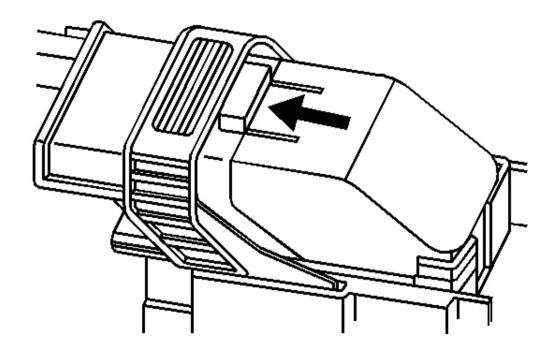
Disengaging Lever Lock Courtesy of GENERAL MOTORS CORP.
